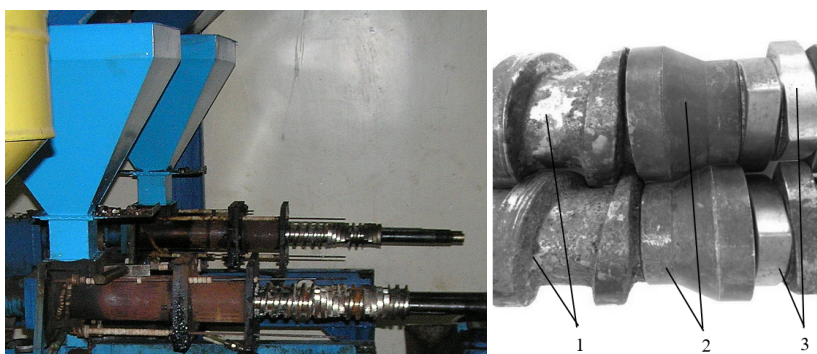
Fragments of working bodies of a twin-screw extrusion presses: a) – the experimental extrusion presses during the replacement of working bodies, b) – a fragment of working bodies, which included the developed cylindrical-cone nozzles: 1 – screw nozzles; 2 – cylindrical-cone nozzles; 3 – triangular cam nozzles
